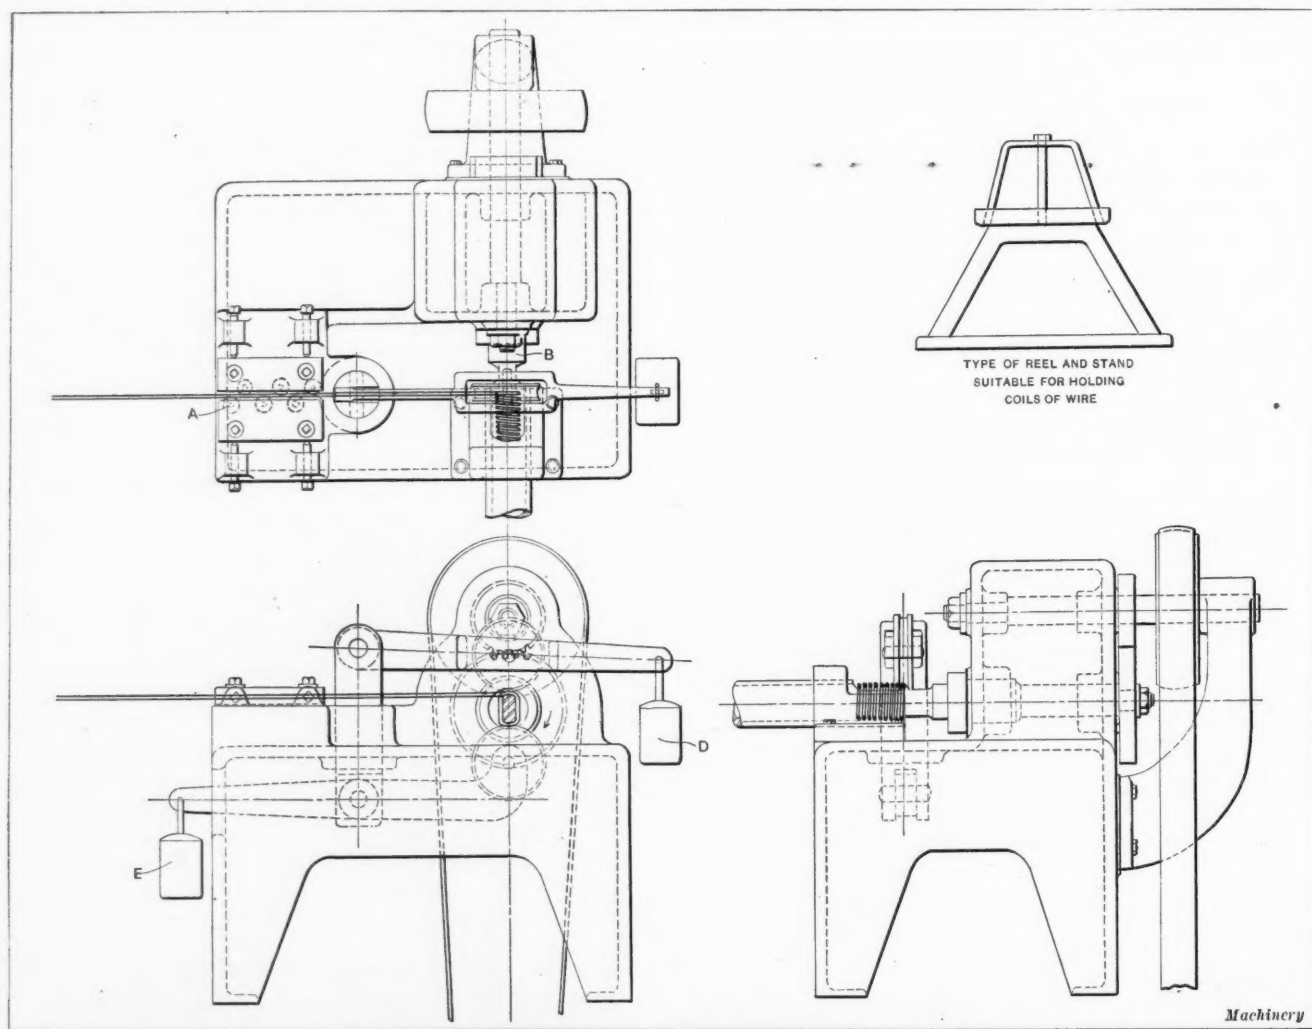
General Construction of Machine for rolling Wire into Spiral Coils
